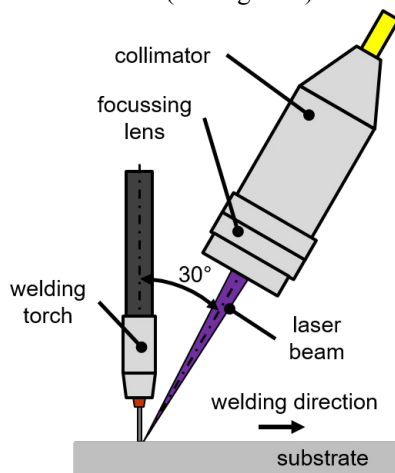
Experimental arrangement of the laser beam and the welding torch.
